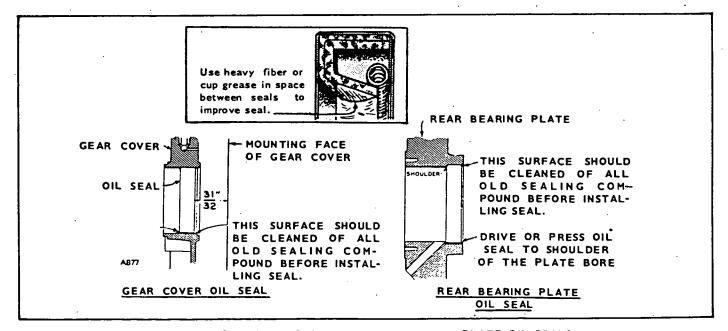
GEAR COVER AND REAR BEARING PLATE OIL SEALS
